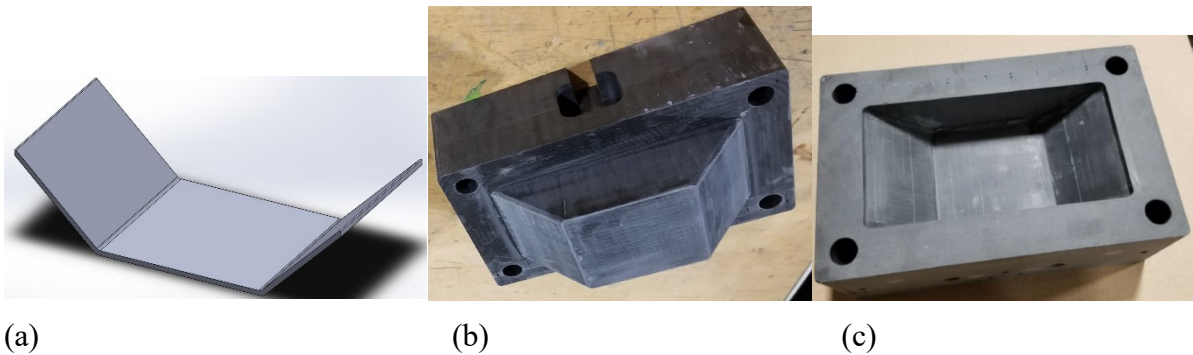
(a) the part geometry; (b) the male mold or punch and (c) the female mold or die
